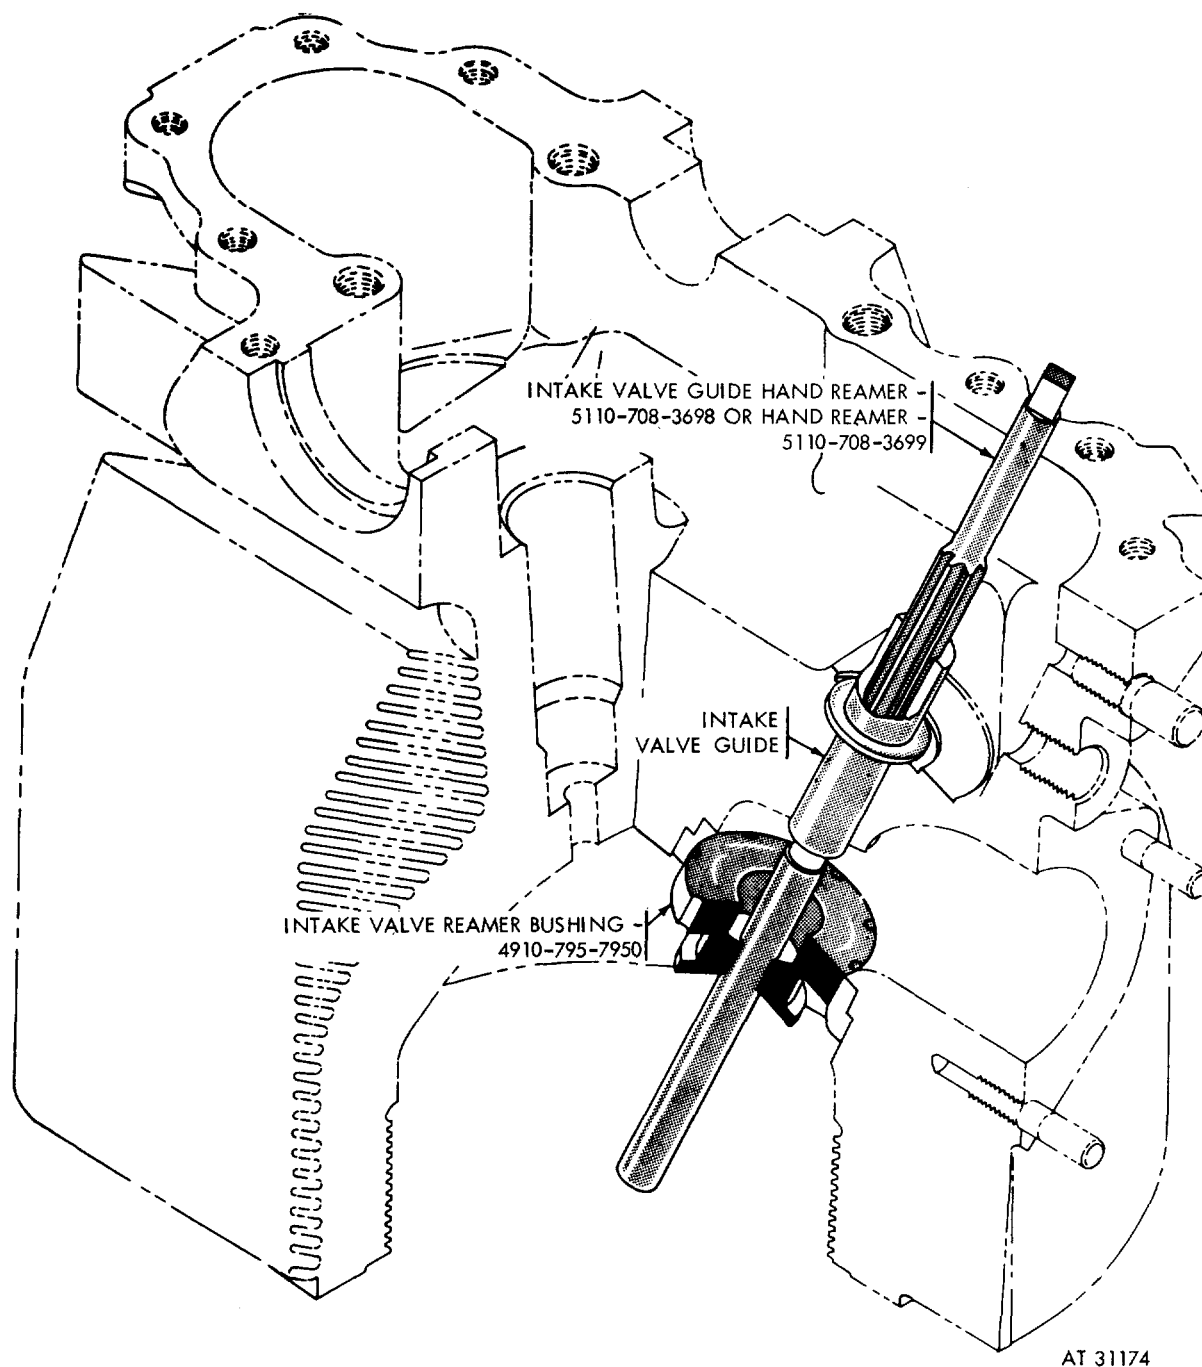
Intake valve guide hand reamer - 5110-708-3698 or 5110-708-3699 and reamer bushing - 910-795-7950 positioned in cylinder head-sectional view.
